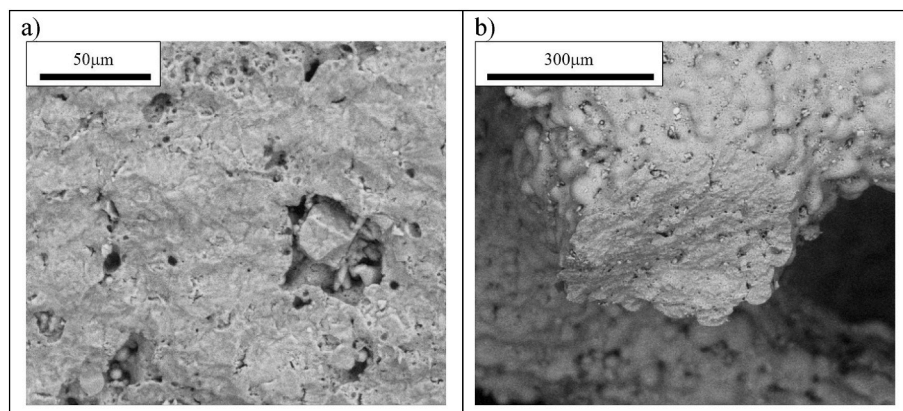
Details of broken struts: a) internal voids; b) full cross-section.
